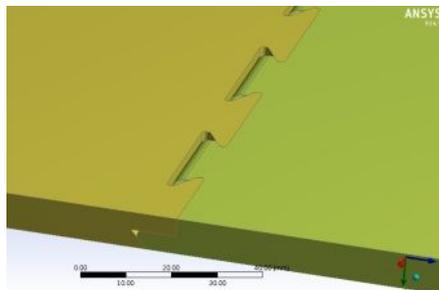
Illustrating lower side view of empty spaces of dovetail joint
